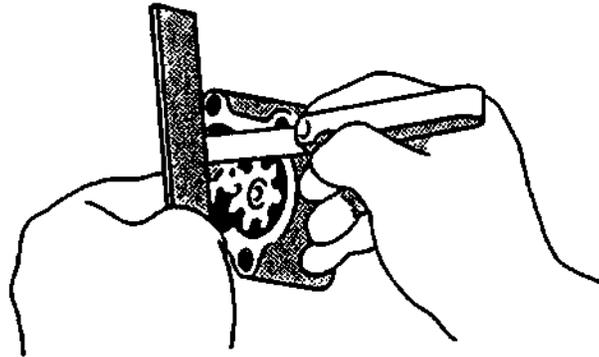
Measuring Oil Pump Axial Clearance
